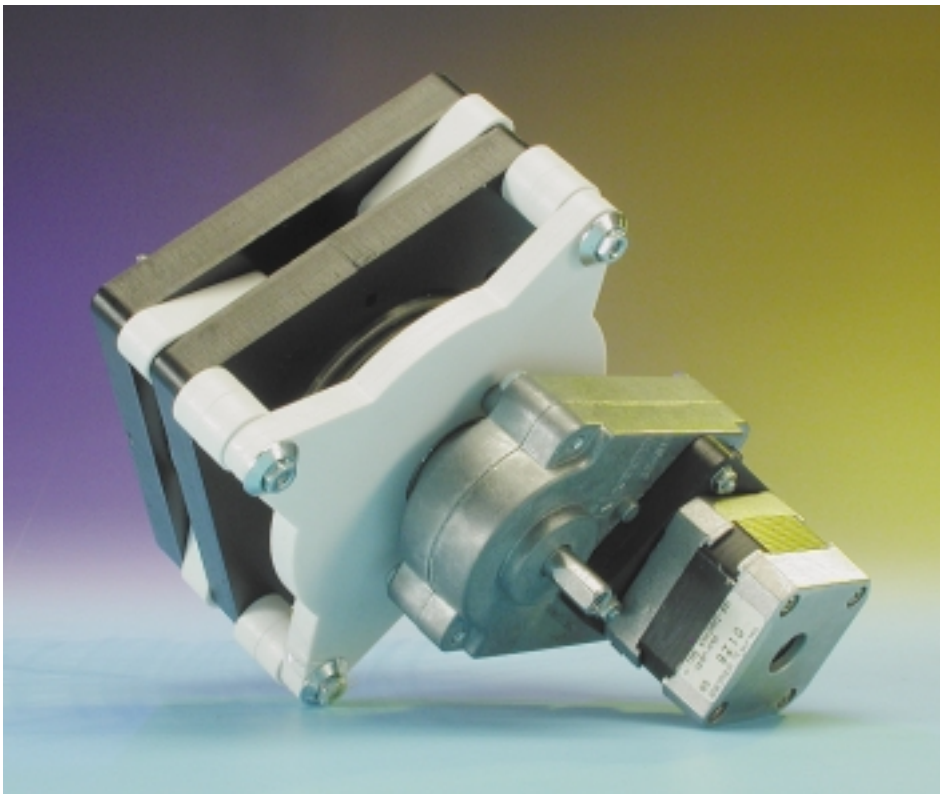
The motor is connected to the gearbox via a flange screwed to each, and the star-shaped drive fixing is screwed to the output of the gearbox.
